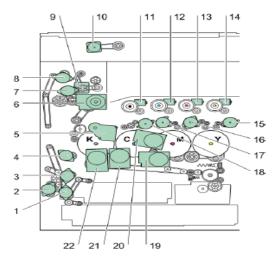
The drive layout for the toner supply system 9.inversion motor 12.toner bottle drive motor of cyanic color 13. toner bottle drive motor of magenta color 14. toner bottle drive motor of yellow color 15.toner transport motor of yellow color 16.toner transport motor of magenta color 17. toner transport motor of cyanic color 18. toner transport motor of black color 19.development motor of cyanic, magenta,
